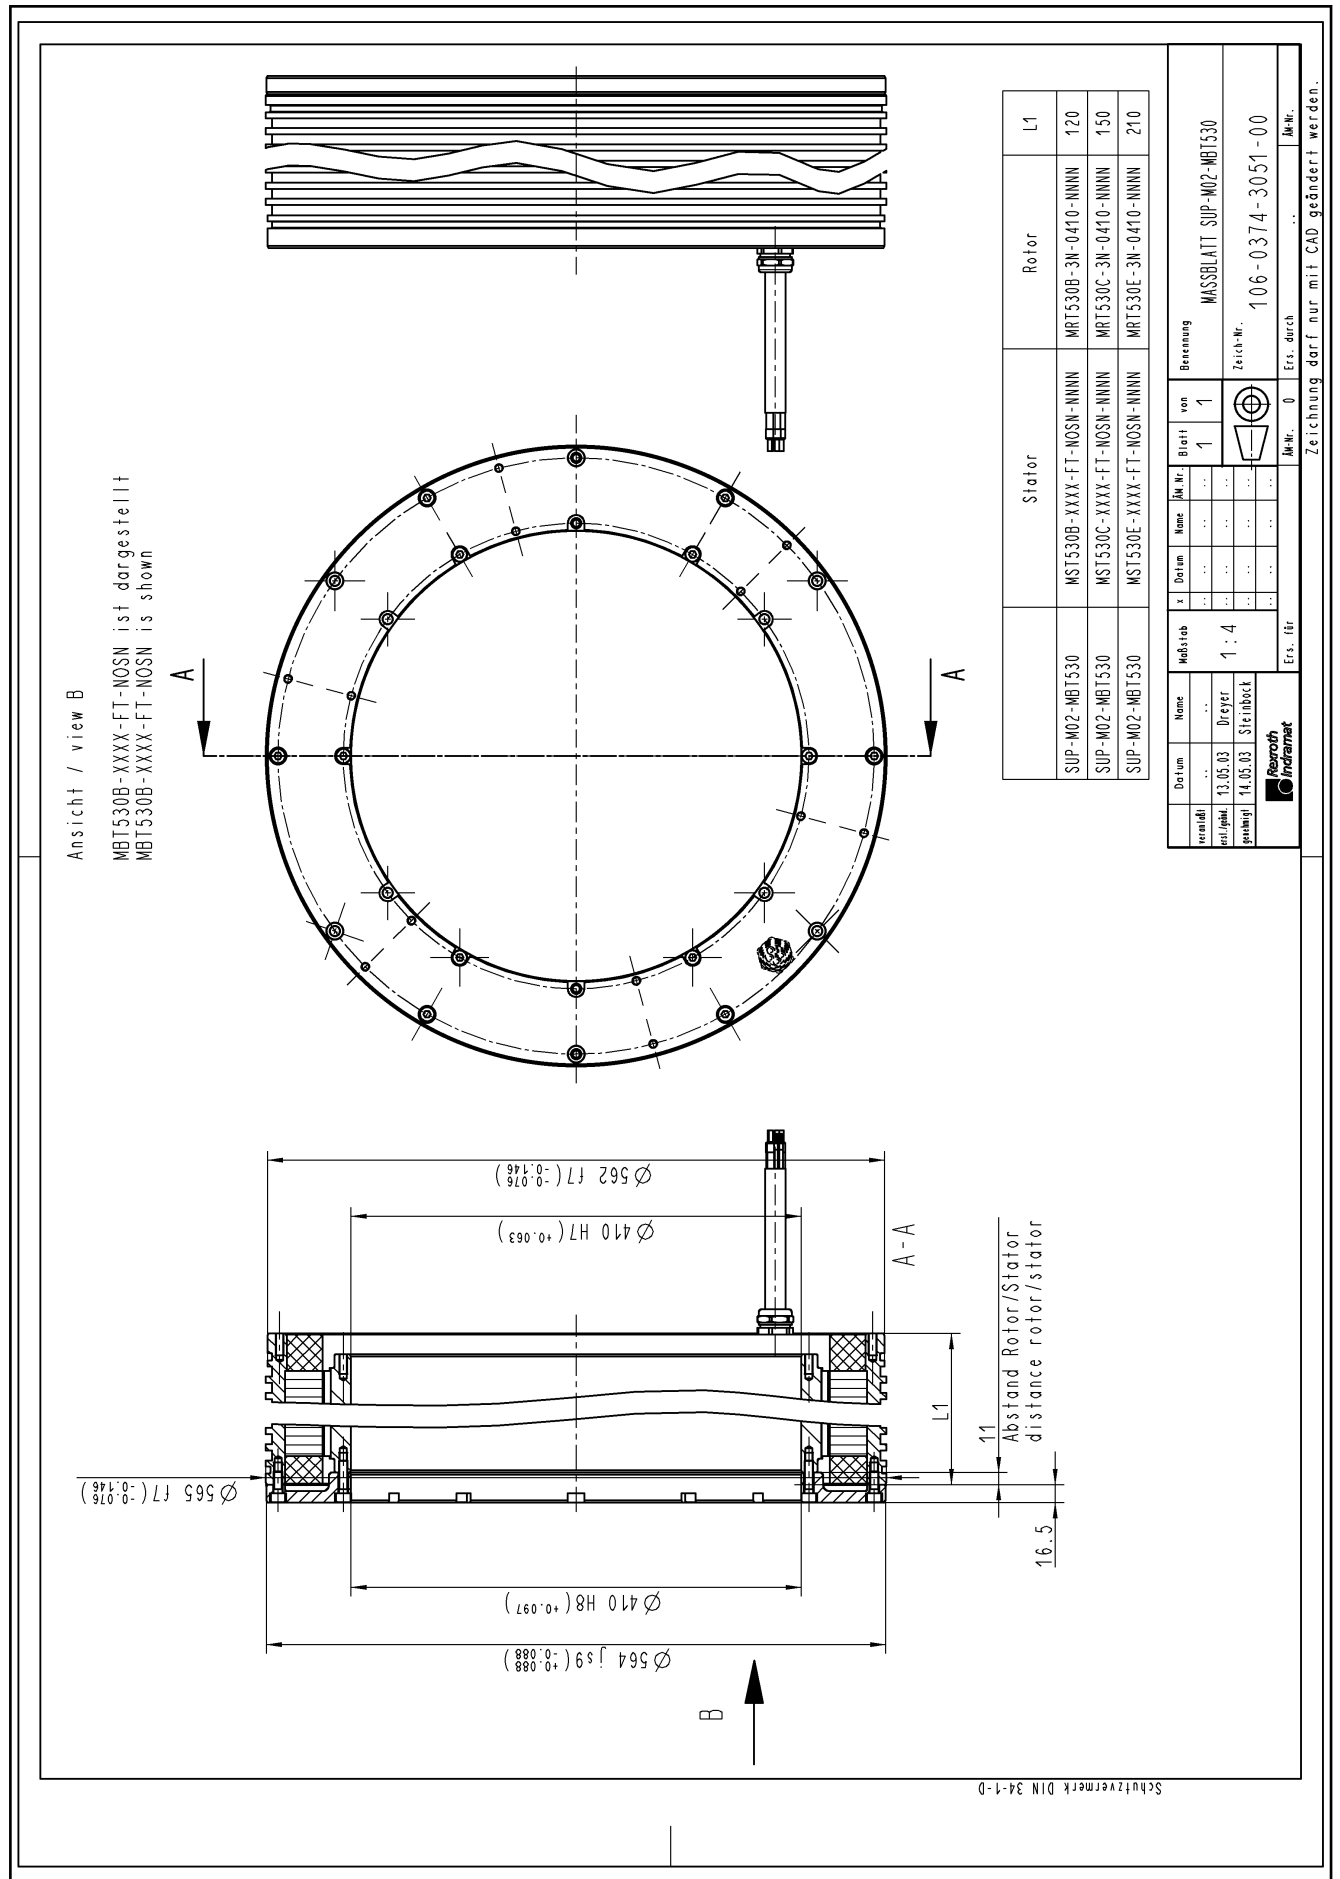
Dimension sheet for mounting ring in SUP-M02-MBT530
